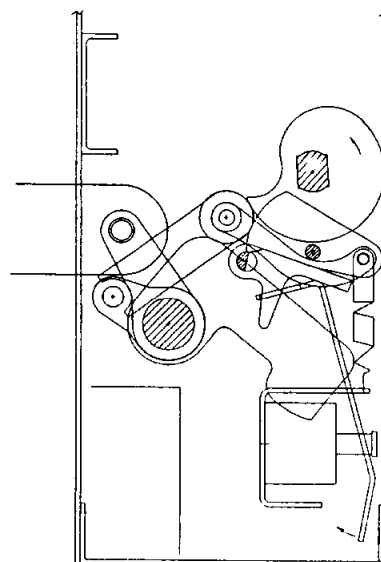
Breaker Open and Closing Spring Not Charged
